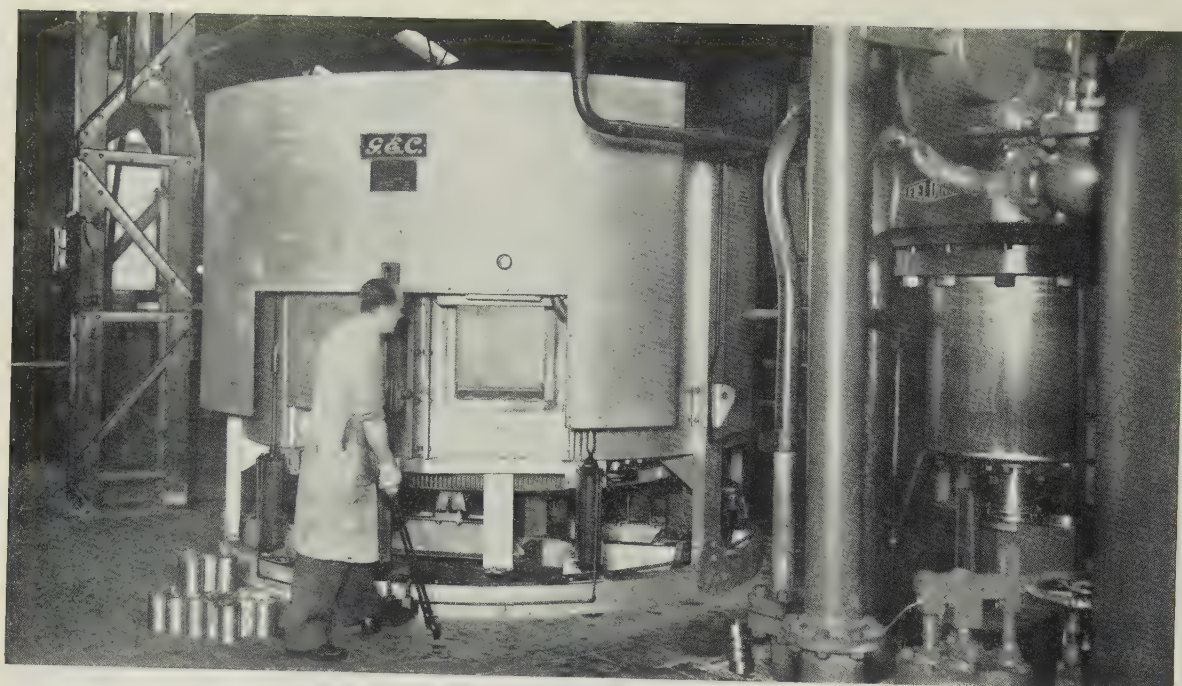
Front View of Rotary-Hearth, Billet-Heating Furnace.
